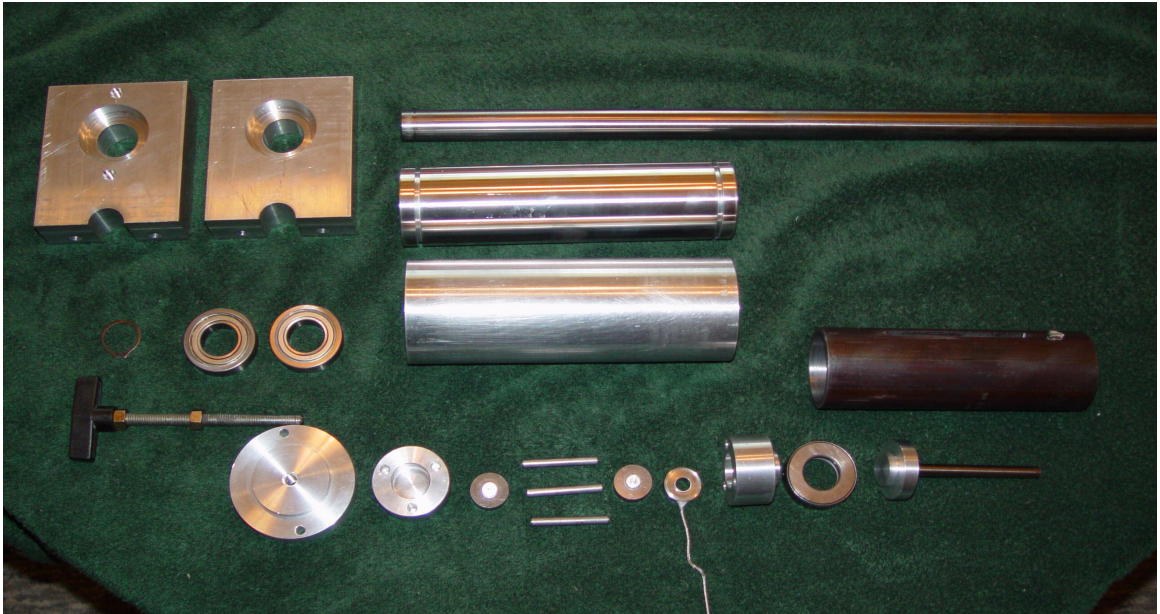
Machined Parts for the Dynamically Variable Crown Roller
